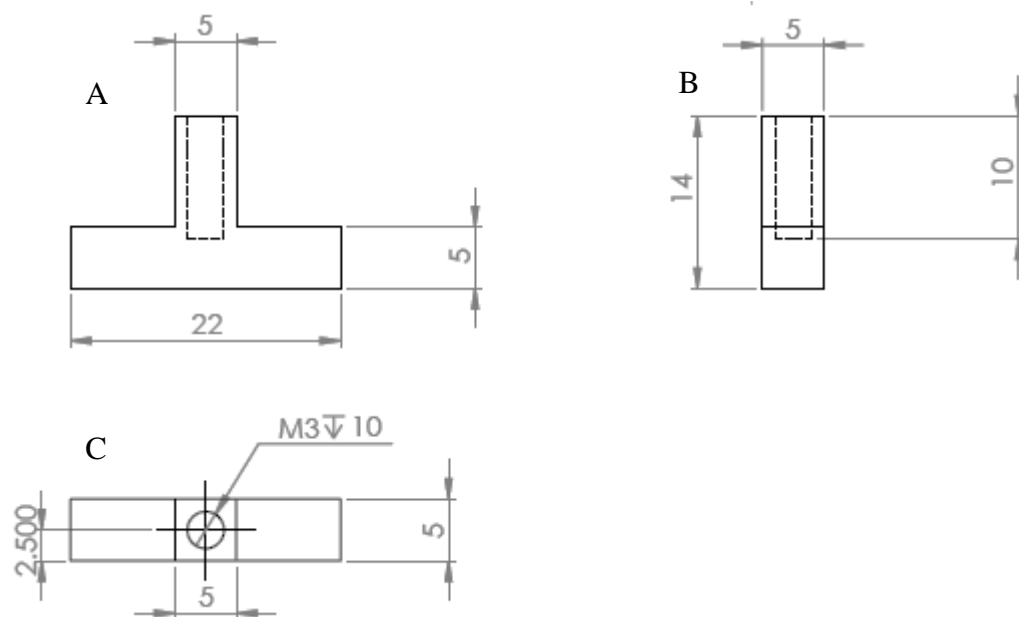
An Aluminum locked pole drawing in mm scale, (A) front view, (B) side view and (C) top view.
